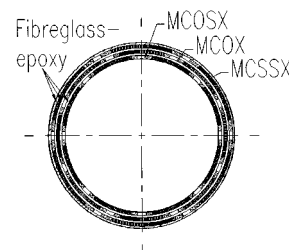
Cross-section of the coil assembly of the prototype magnet.
